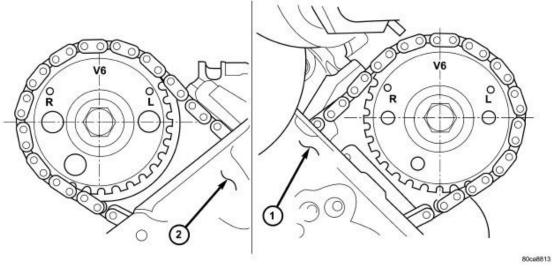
CAMSHAFT SPROCKET V6 MARKS (#1 TDC, Exhaust stroke) Courtesy of CHRYSLER LLC
